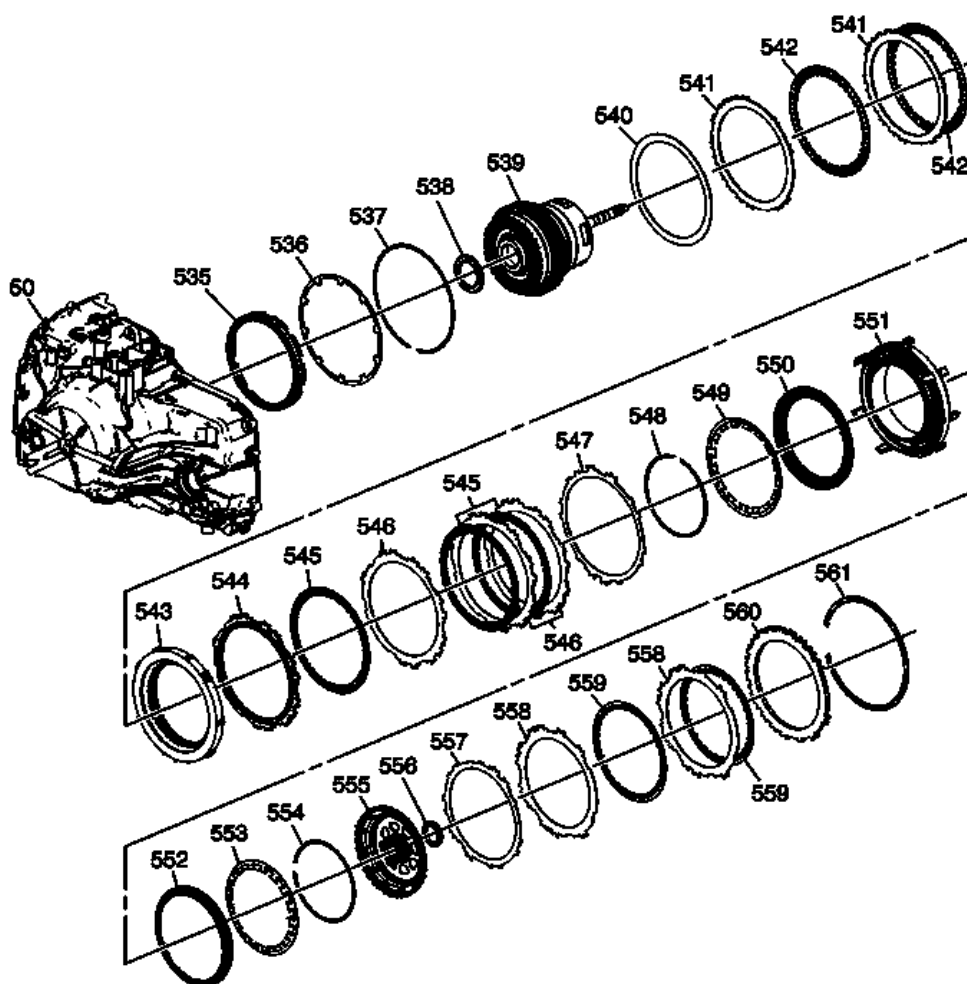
2-6, Low, Reverse And 1-2-3-4 Clutch Plate Assemblies - Gen 2
